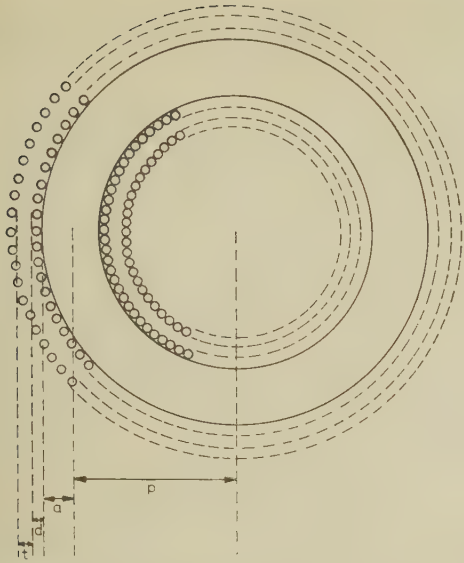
Dimensions of transformer with single-layer windings and all sections circular.
